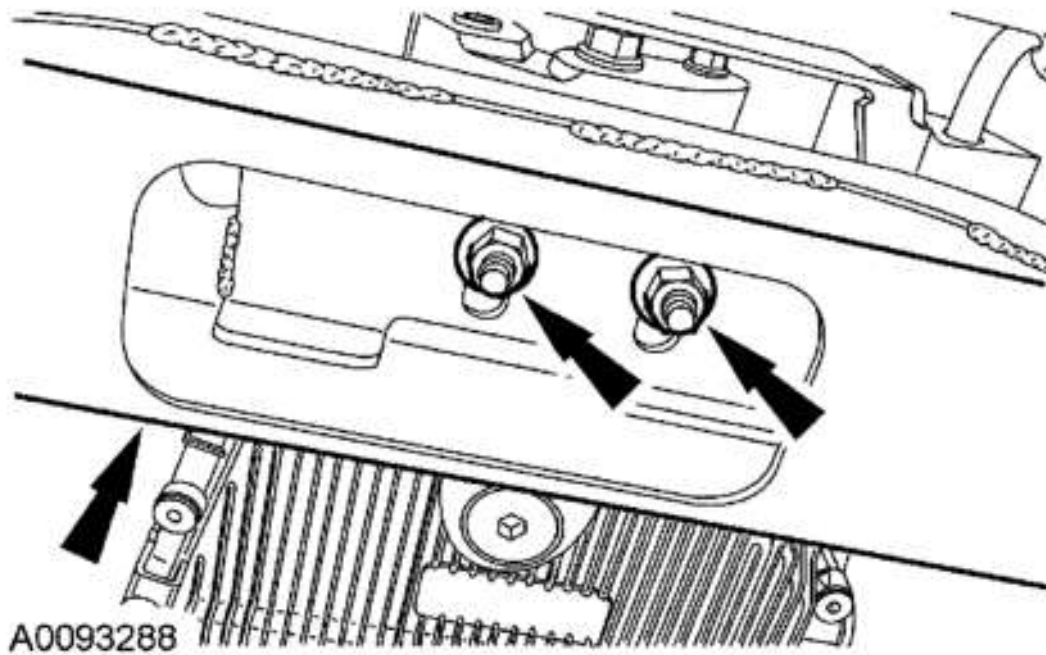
Removing Rear Transmission Nuts And Crossmember
